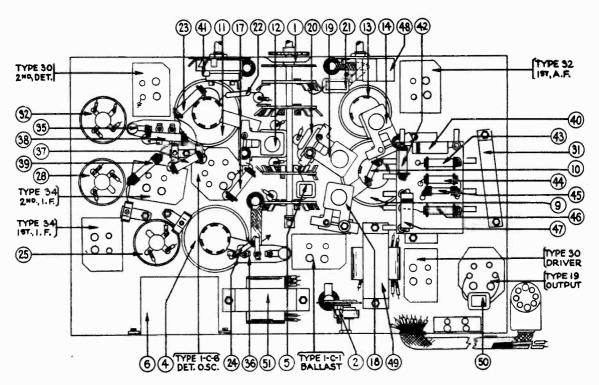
Bottom View of Chassis, Showing Parts, and Position of Compensating Condensers Reached from Below Chassis
